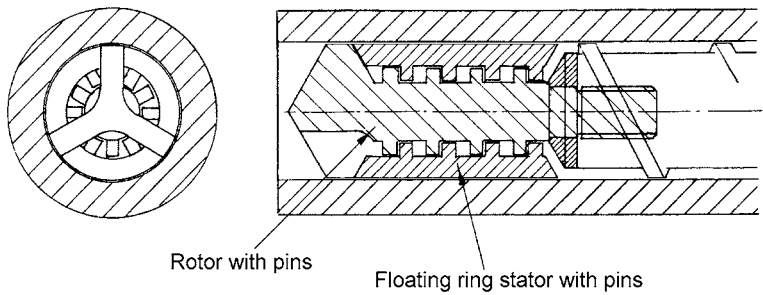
Potential adaption for extrusion of the injection moulding check ring mixer by Elbe.
